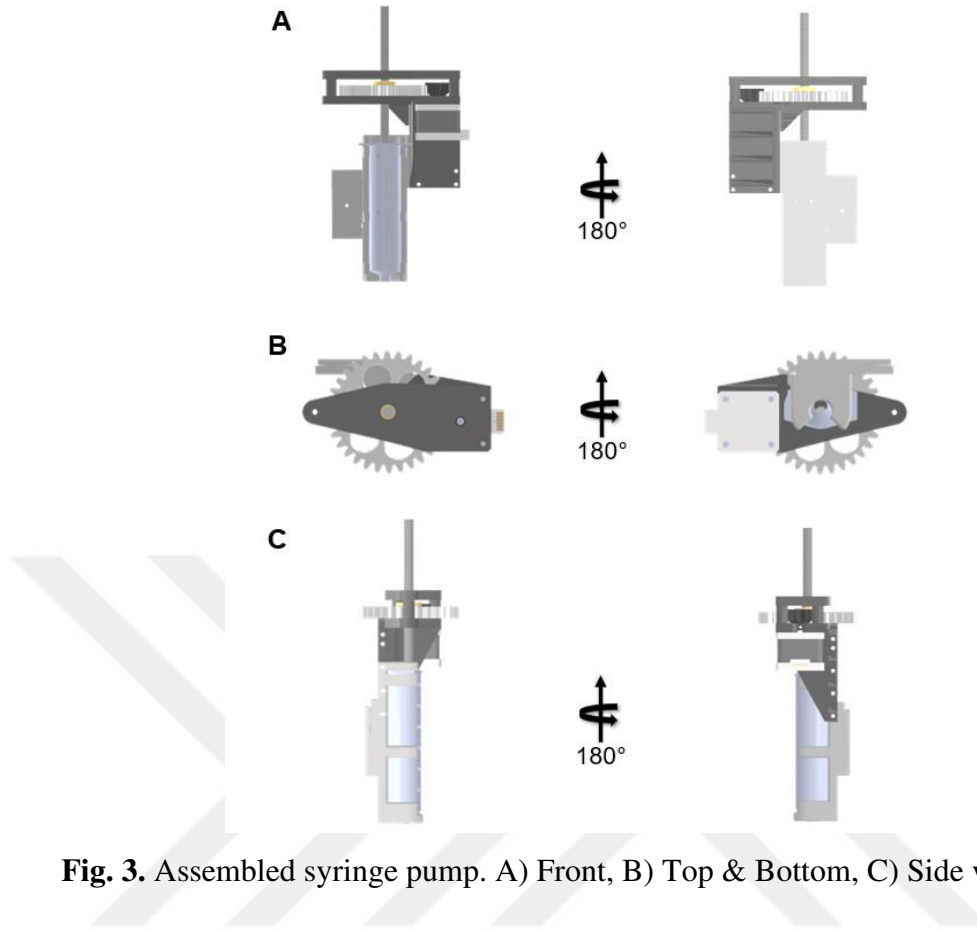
Assembled syringe pump. A) Front, B) Top & Bottom, C) Side view.
